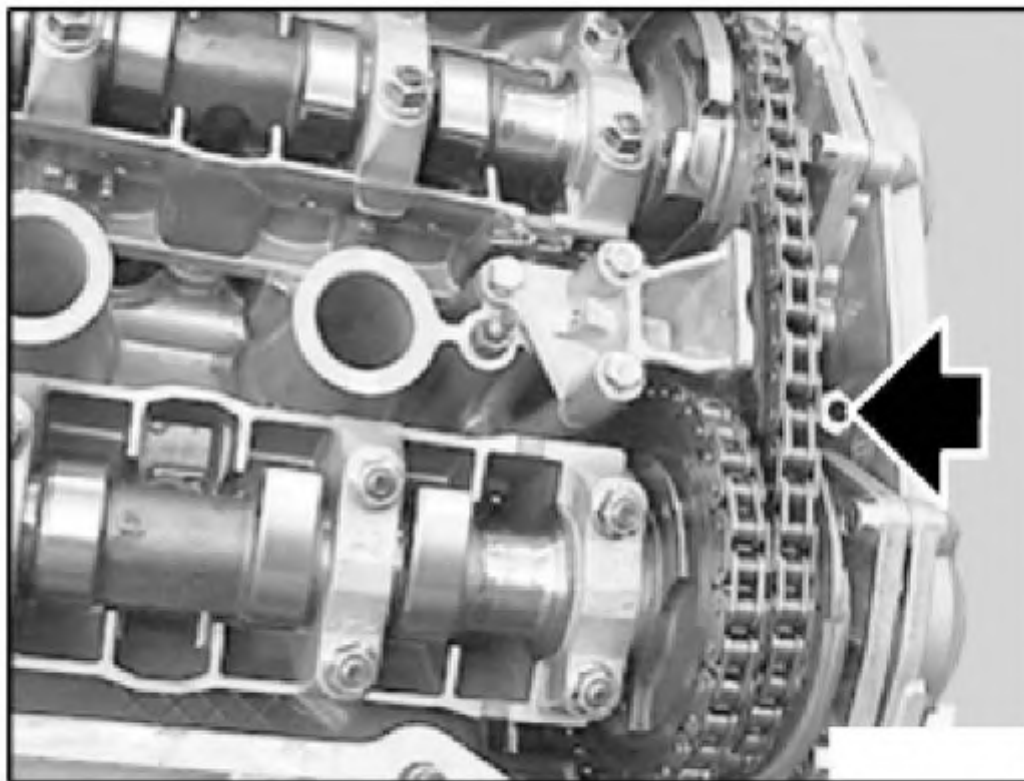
Installing Compressed Air Fitting To Banjo Bolt
